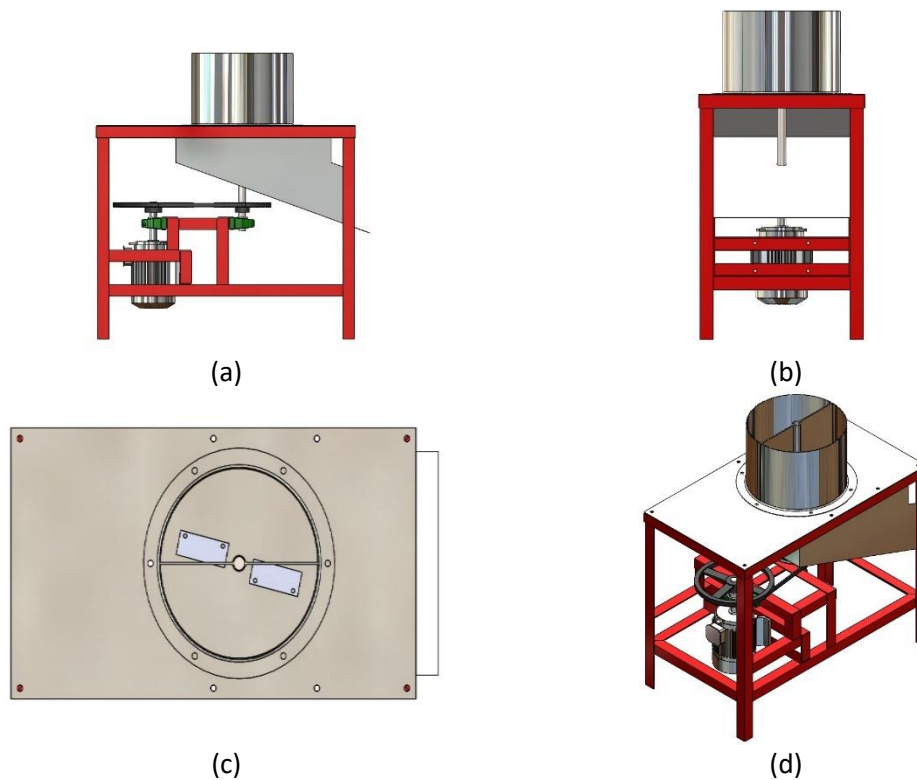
Design Results of Potato Grater Machine Design with Rotary Drive (A) Front View (B) Side View (C) Top View and (D) Isometric View
